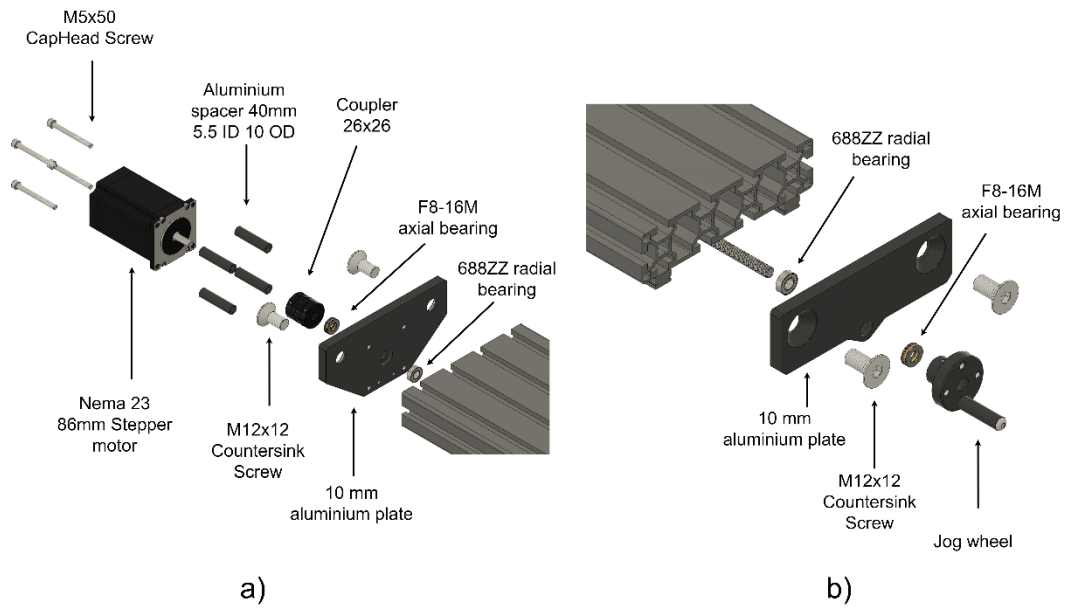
a) Left side of the X-axis, illustrating the assembly order and components of the stepper motor mount. b) Right side of the X-axis assembly, illustrating the end plate assembly and jog wheel.
